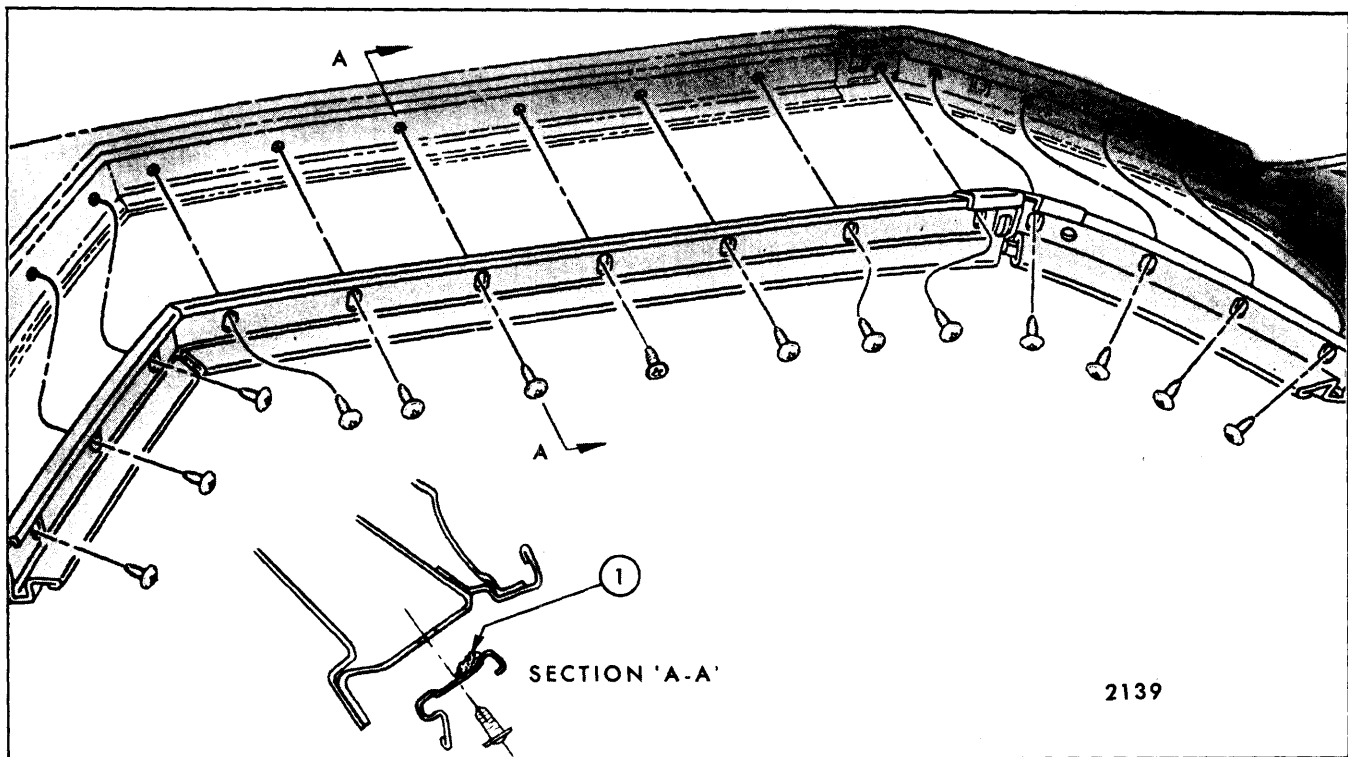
Side Roof Rail Weatherstrip Retainer
